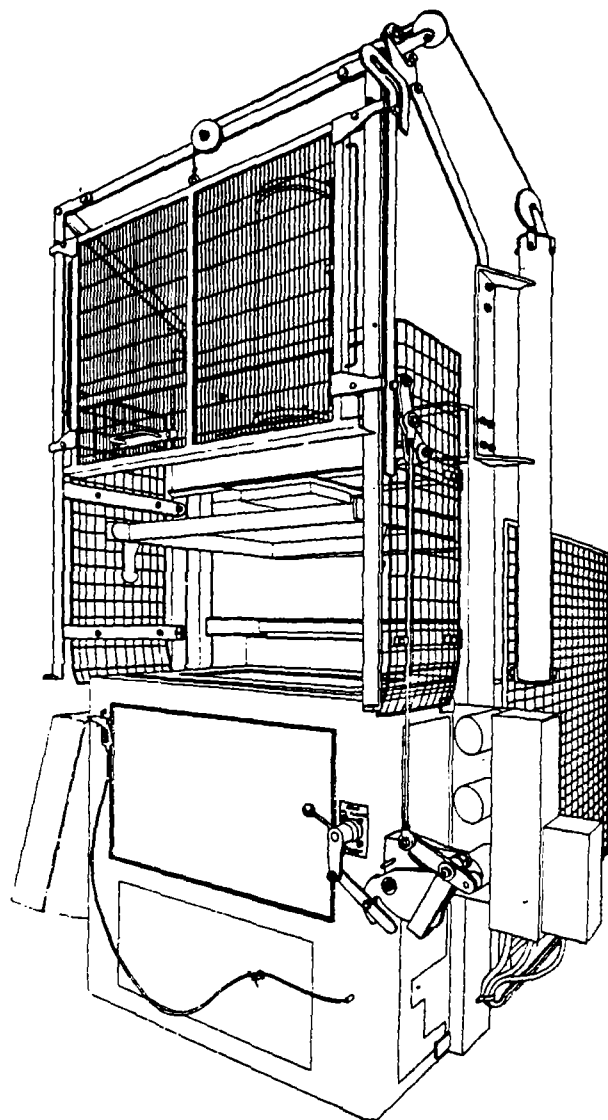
A fully guarded vacuum-forming machine with the safety gate open. In this state, it is impossible to operate the clamping frame until the safety gate is fully closed due to the mechanical interlock between the safety gate and the operating lever. An electrical interlock prevents operation of any other part of the machine until the clamping frame is closed. (By courtesy of the British Plastics Federation.)
